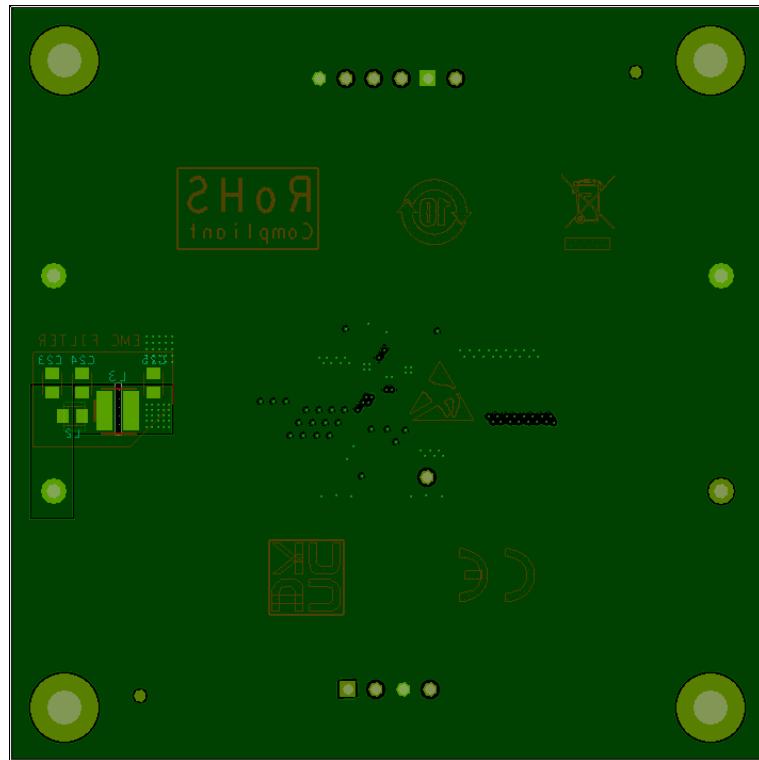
PCB layout (internal layer 2)Figure 7. PCB layout (bottom)
